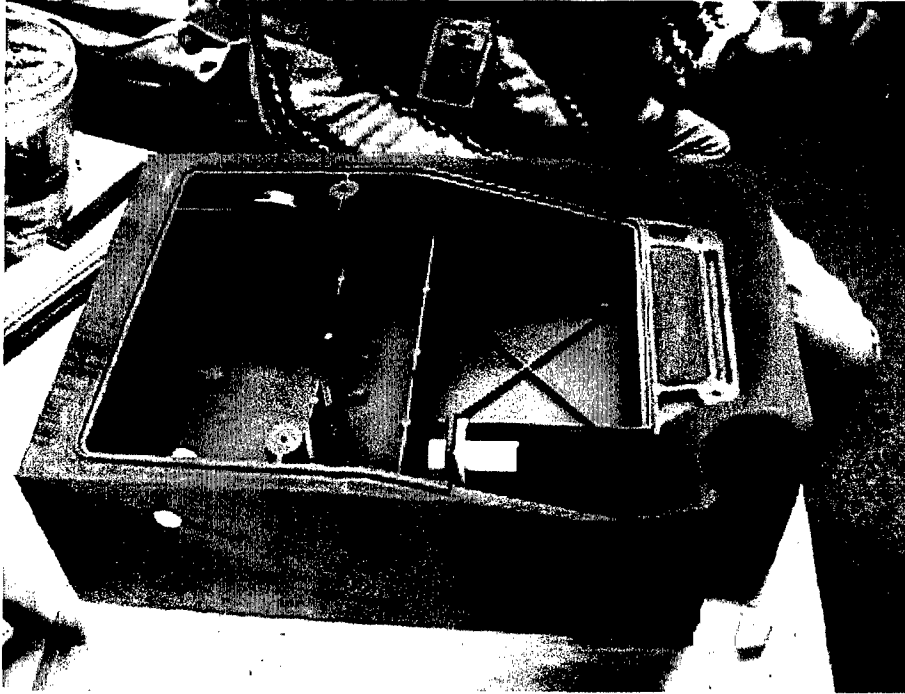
FFLSS Rapid Prototype Lower Case Mold
